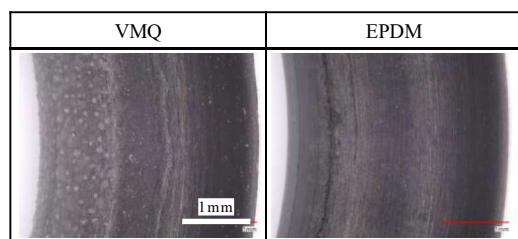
Inner side appearance of O-ring(@-40 °C)
